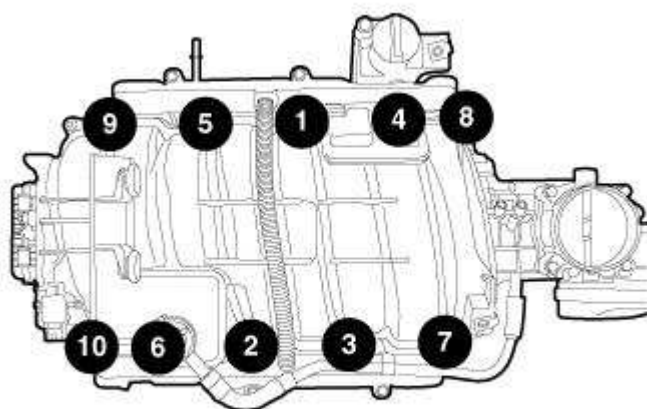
Intake Manifold Retaining Bolt Removal & Tightening Sequence
